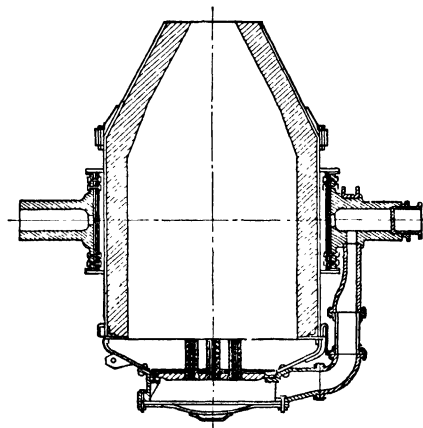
12- to 15-ton Bessemer Converter. Concentric Type.
